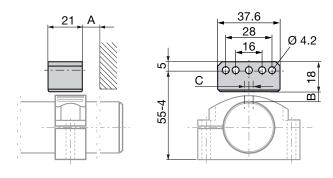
Dimensions and spacing with magnet BTL6-A-3801-2
